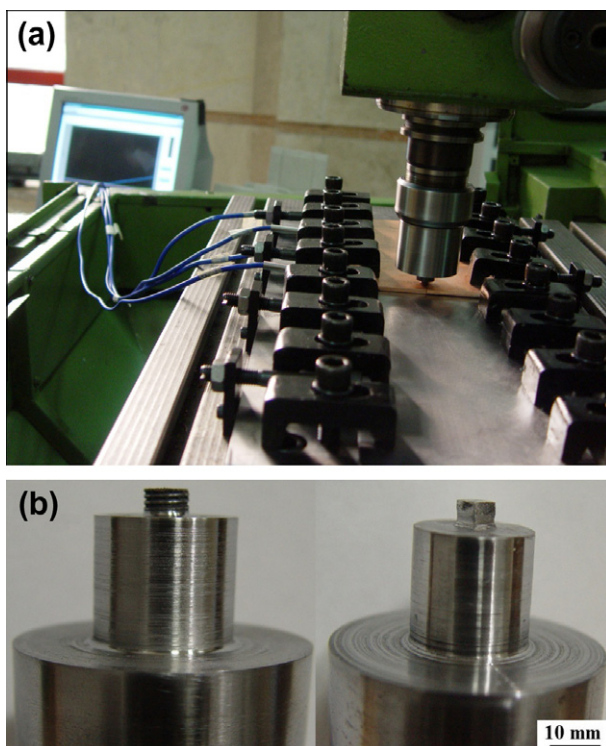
Photograph of: (a) FSW machine equipped with fixture and (b) two different FSW tools.
